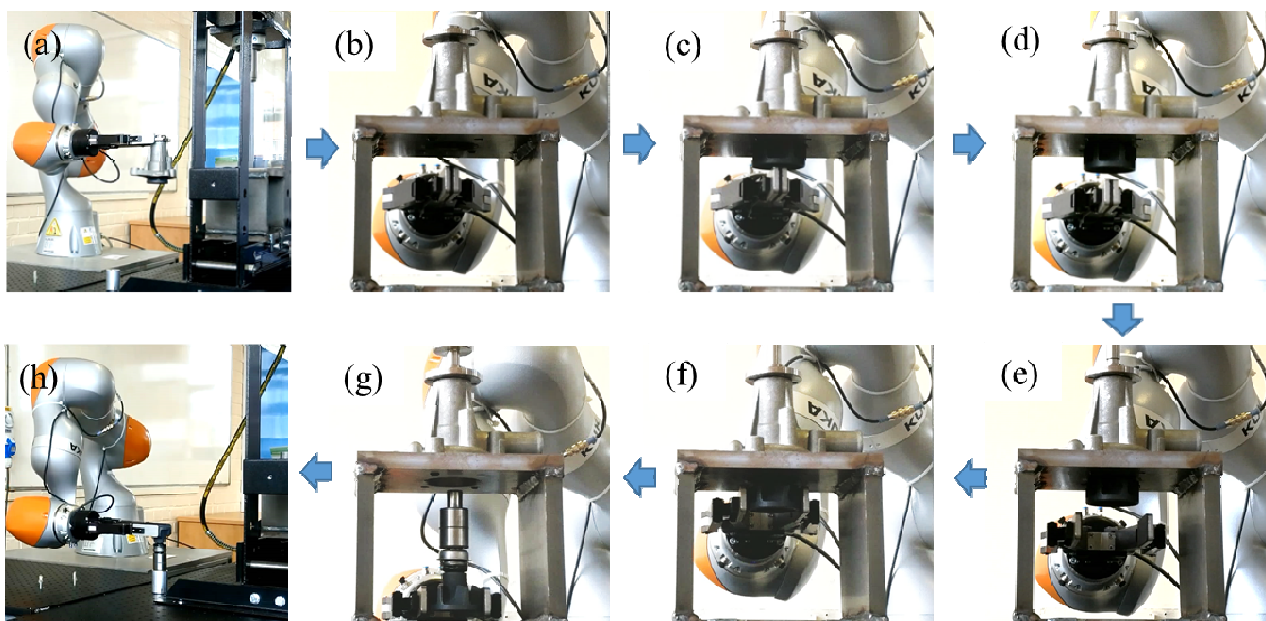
Separation of the rotor subassembly from the flange and pump casing.
